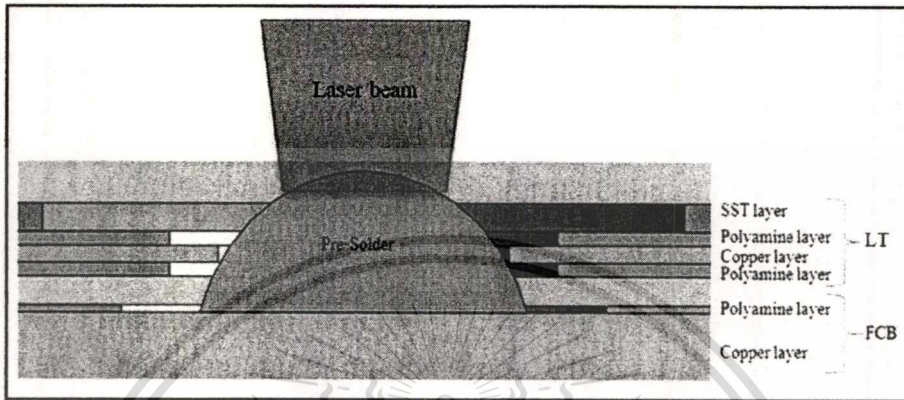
Show direction of laser beam attacked on Pre-Solder
